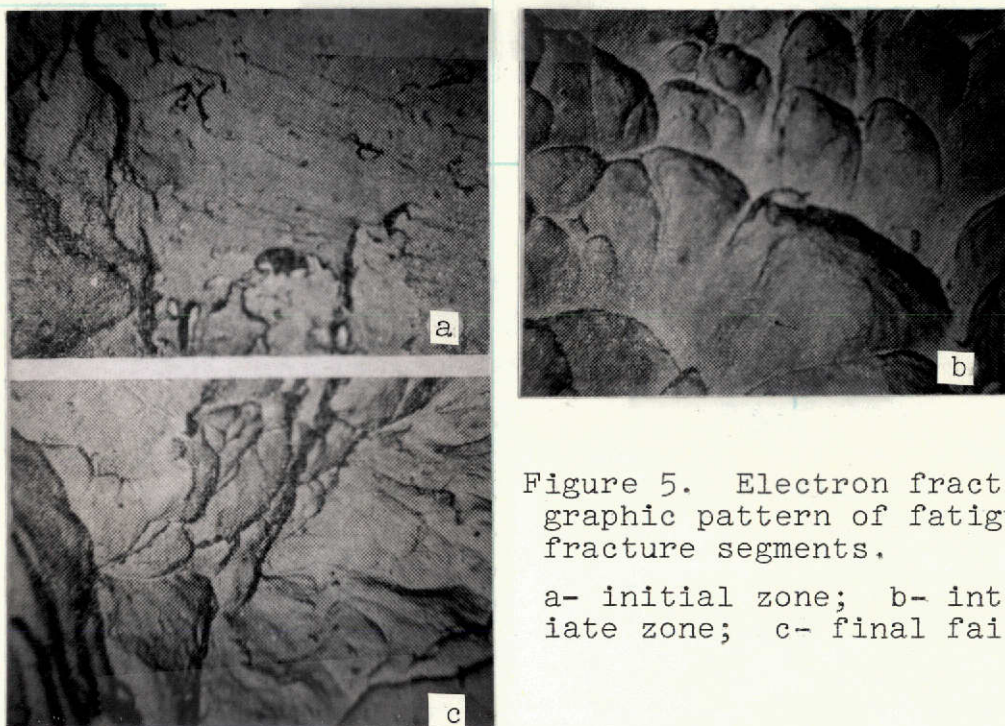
Electron fractographic pattern of fatigue fracture segments.
